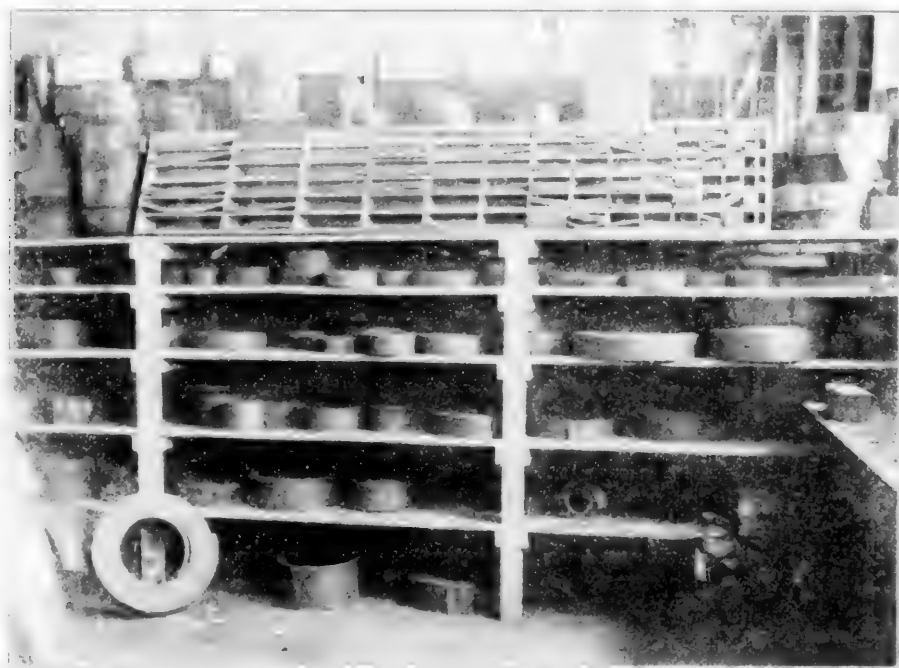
BELT ROOM SHOWING STOCK OF TAKE UP PIECES AND BELTING.
